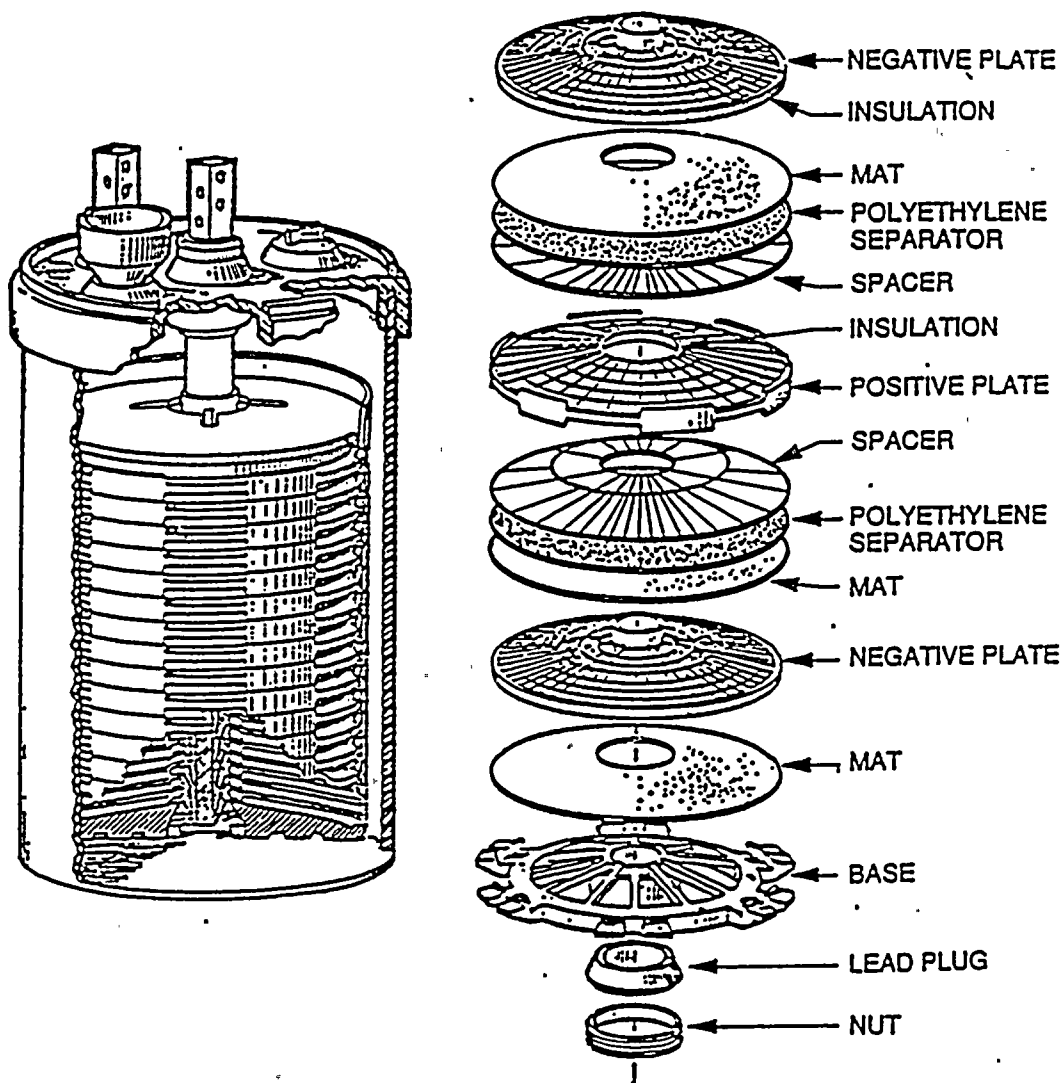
AT&amp;T LINEAGE 2000 Round Cell - Exploded View
